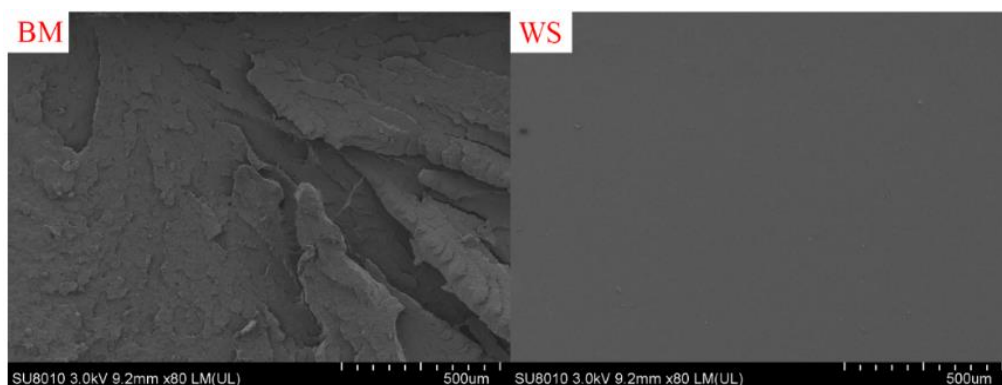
Microscopic morphology of fracture surface of BM and WS specimens
